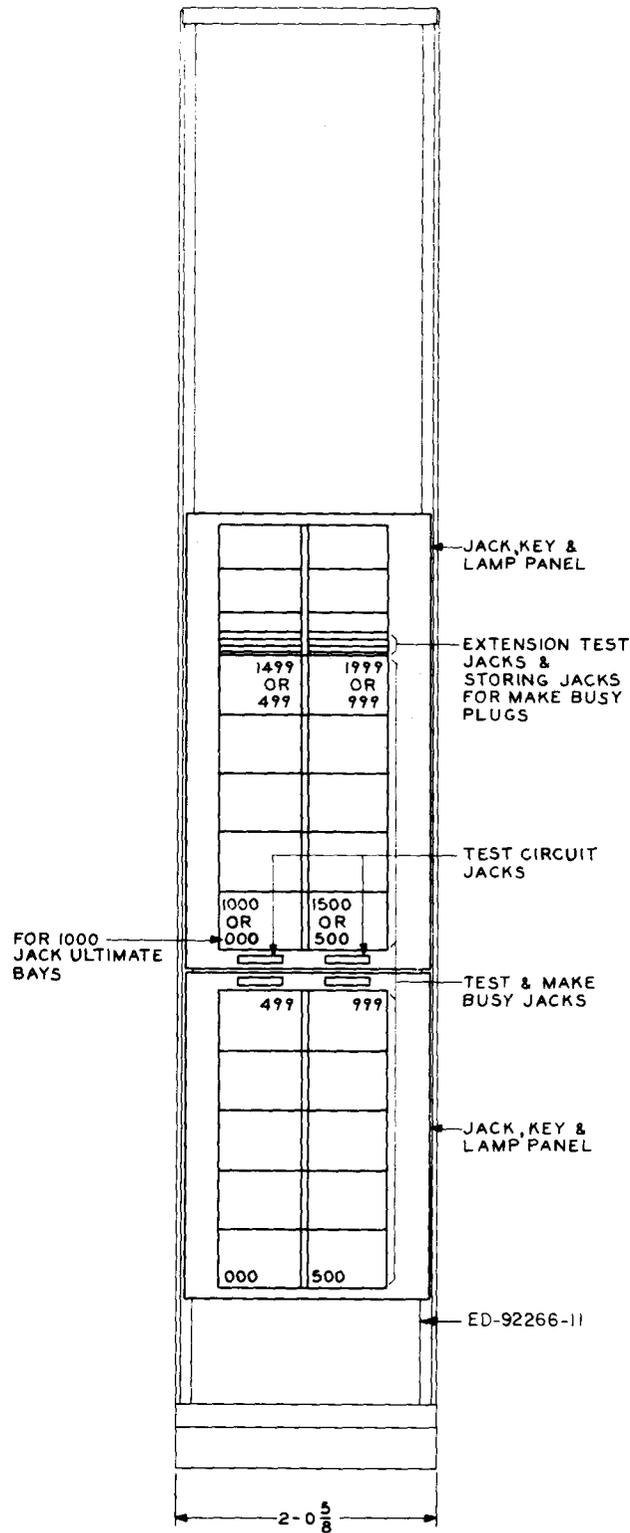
Outgoing Toll Connecting Trunk Test and Make-busy Jack Bay
